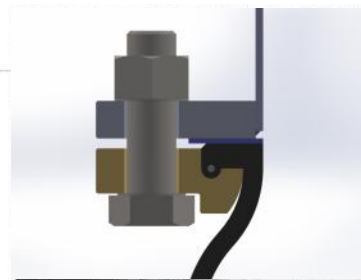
Flange provided with flat sealing gasket to protect the rubber surface.
